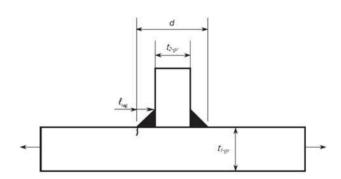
Toe distance for cruciform welded joints, transverse T-joints and plates with transverse attachment
